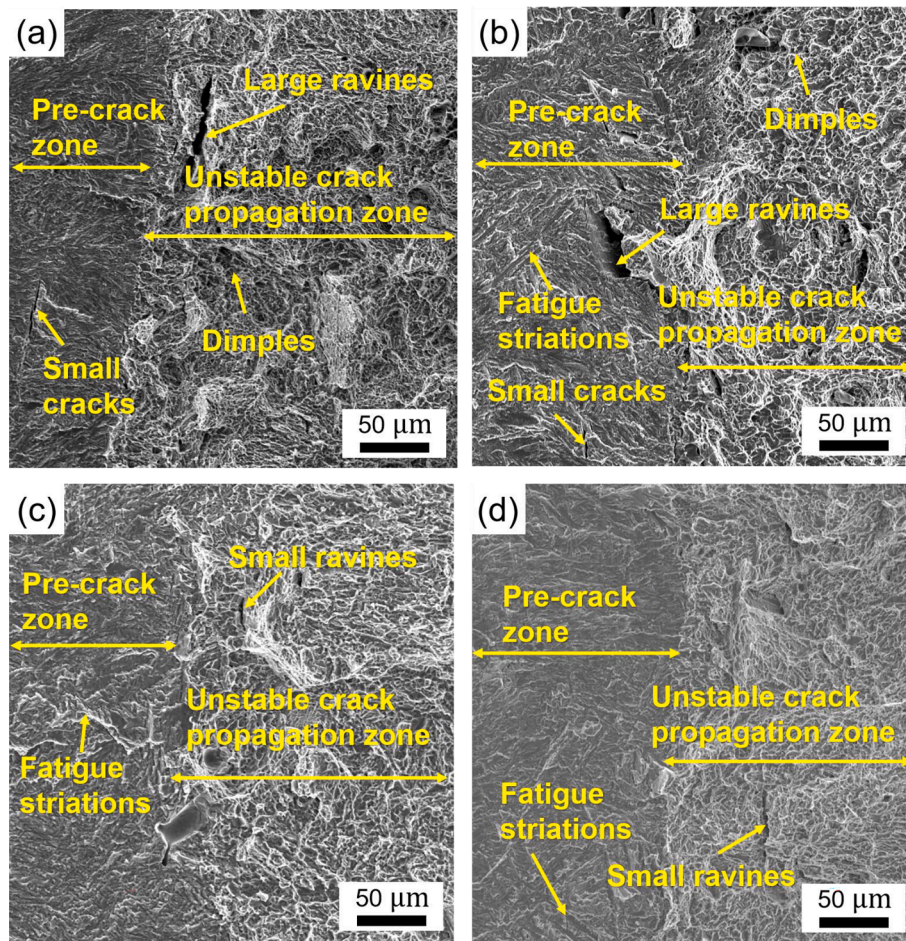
Representative fracture surfaces of 1/2 T specimens at different temperatures: (a) 293 K, (b) 223 K, (c) 173 K, (d) 123 K.
